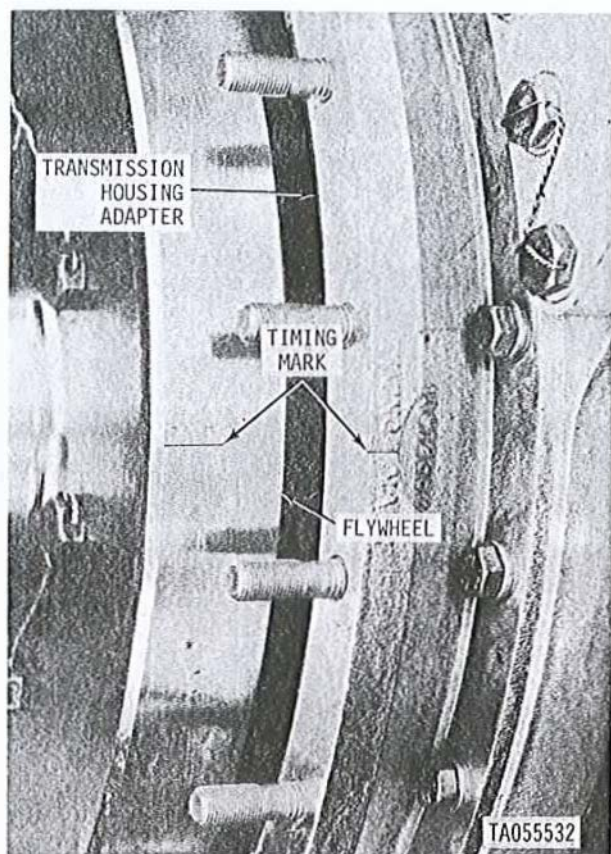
Flywheel in position for fuel injection pump timing, model AVDS-1790-2DR engine.
